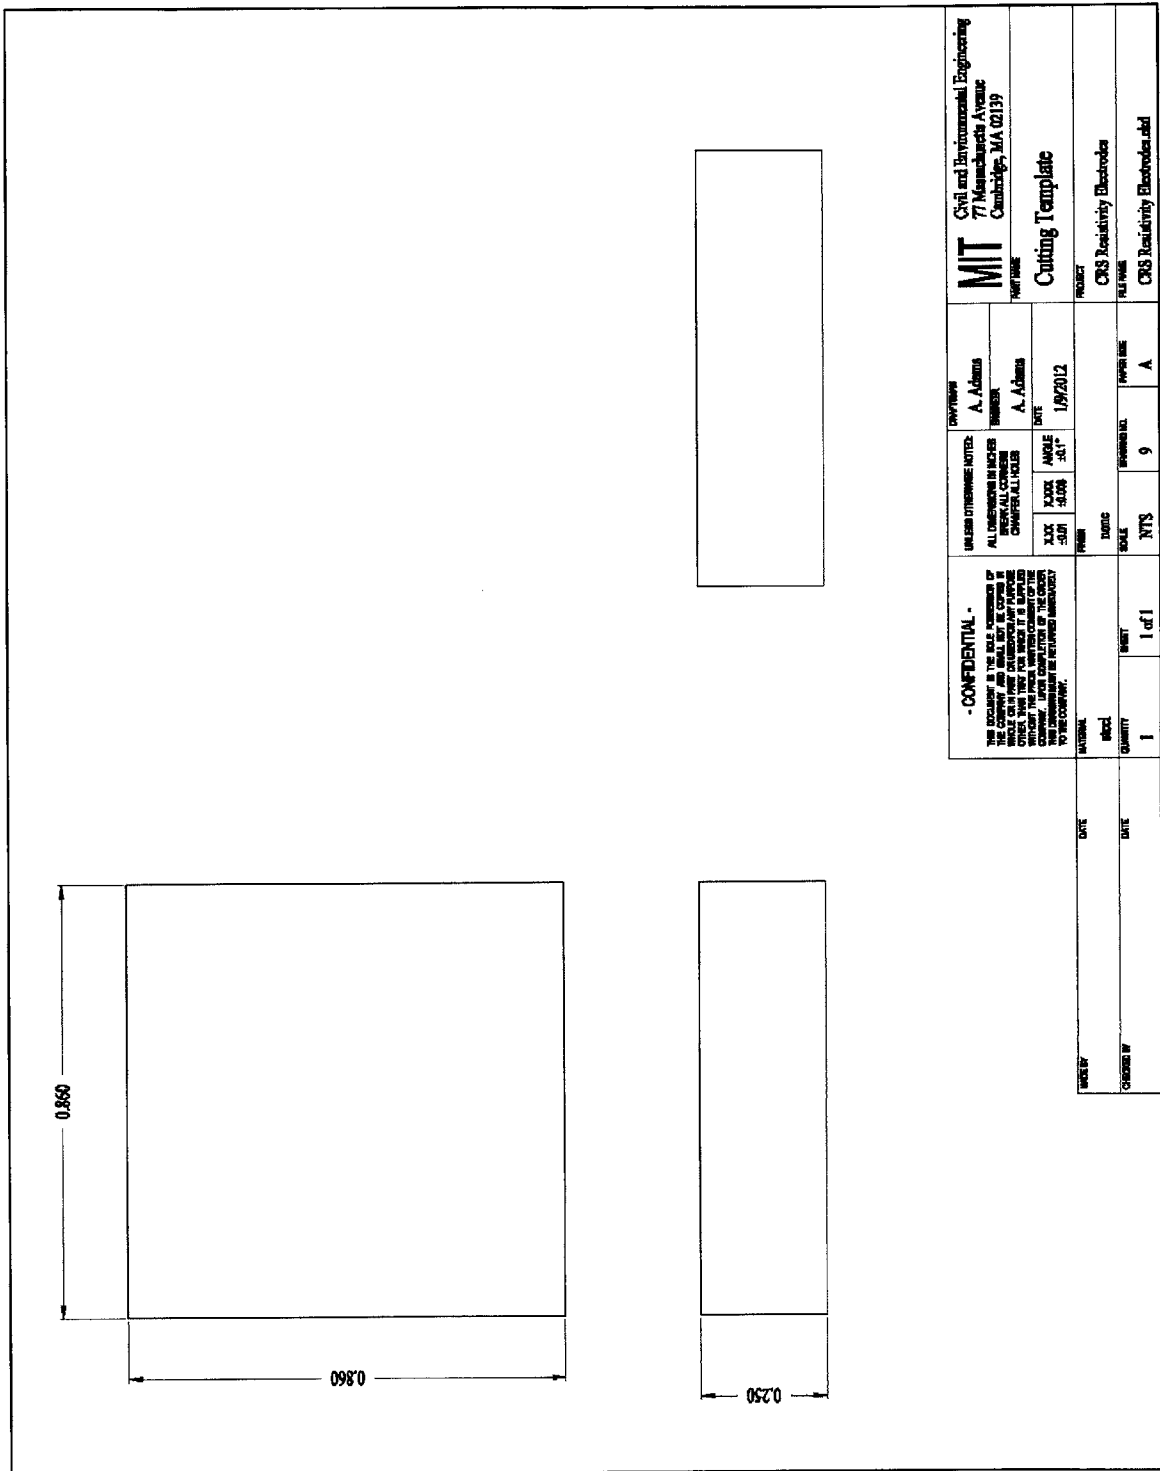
CRS Electrodes: Drawing 9, specimen trimming template
